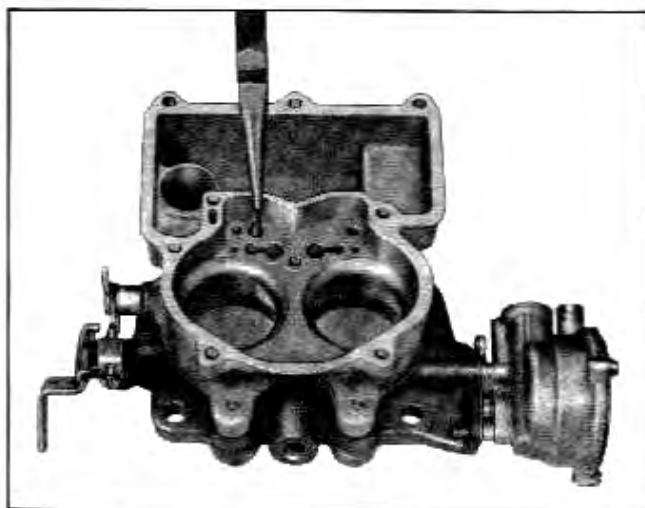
B-15 Removing Pump Discharge Spring Retainer
